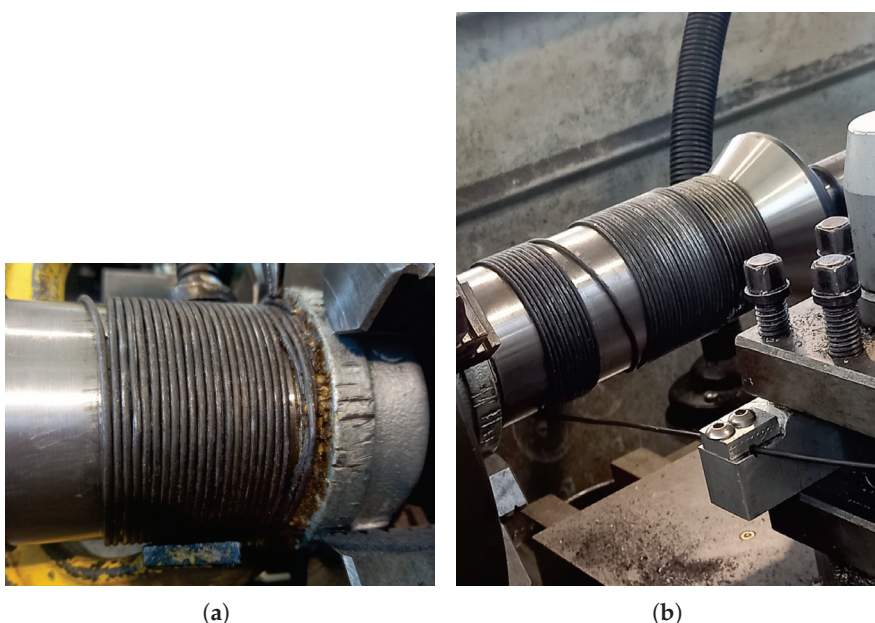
Prototype fabrication: (a) wire layer and (b) assembly.
